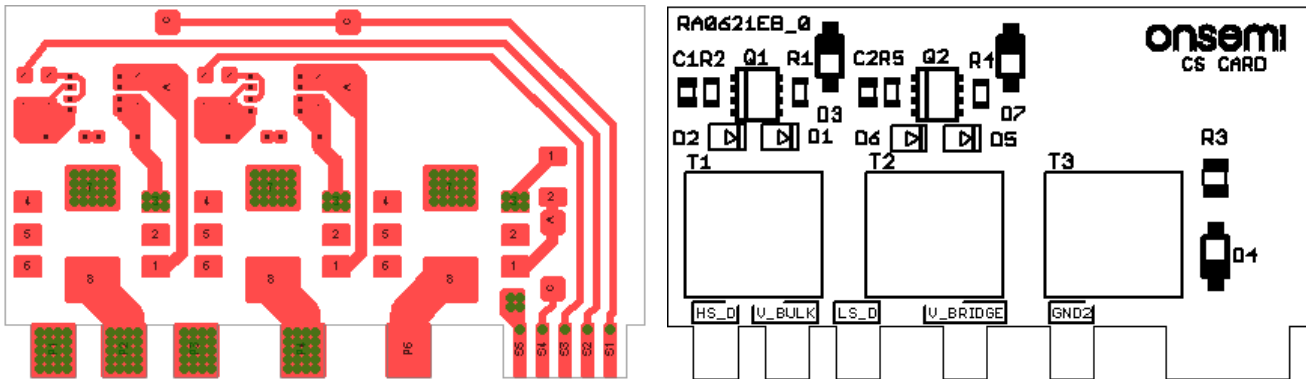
Top Layer PCB Layout and Assembly Plan of CURRENT SENSE CARD
